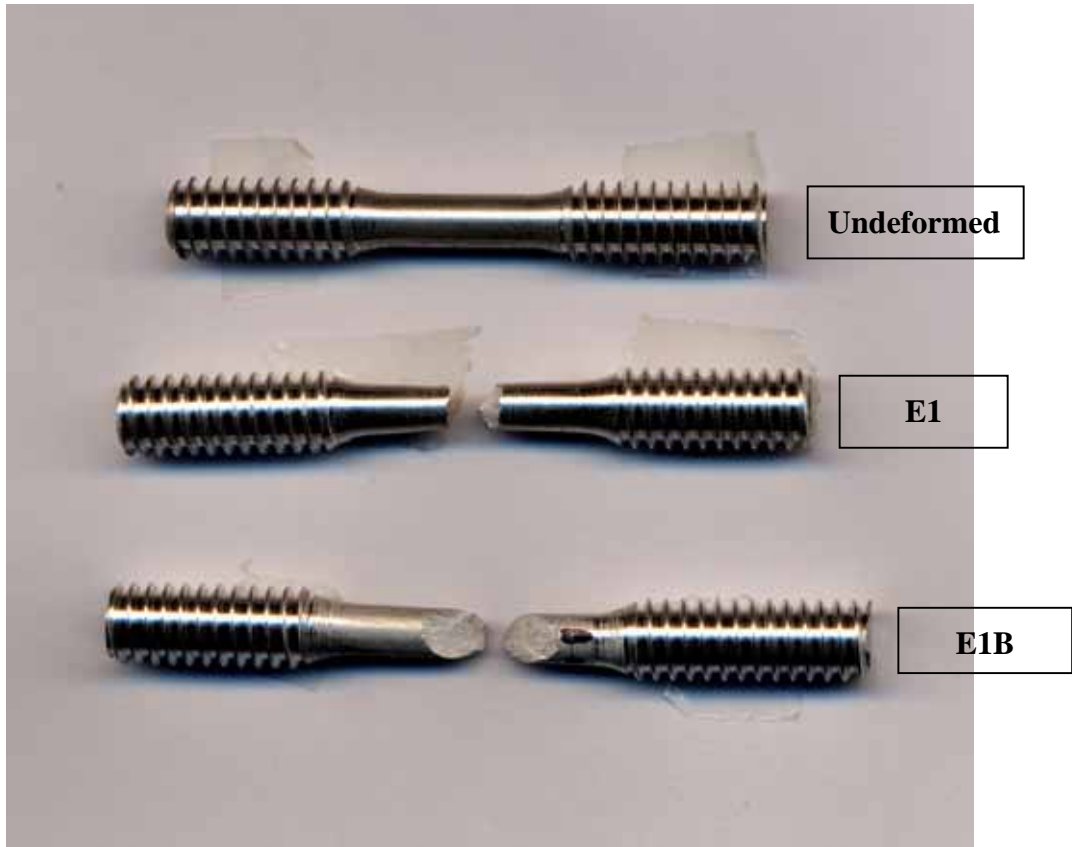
The macroscopic fracture morphology of the E1 and E1B specimens.
